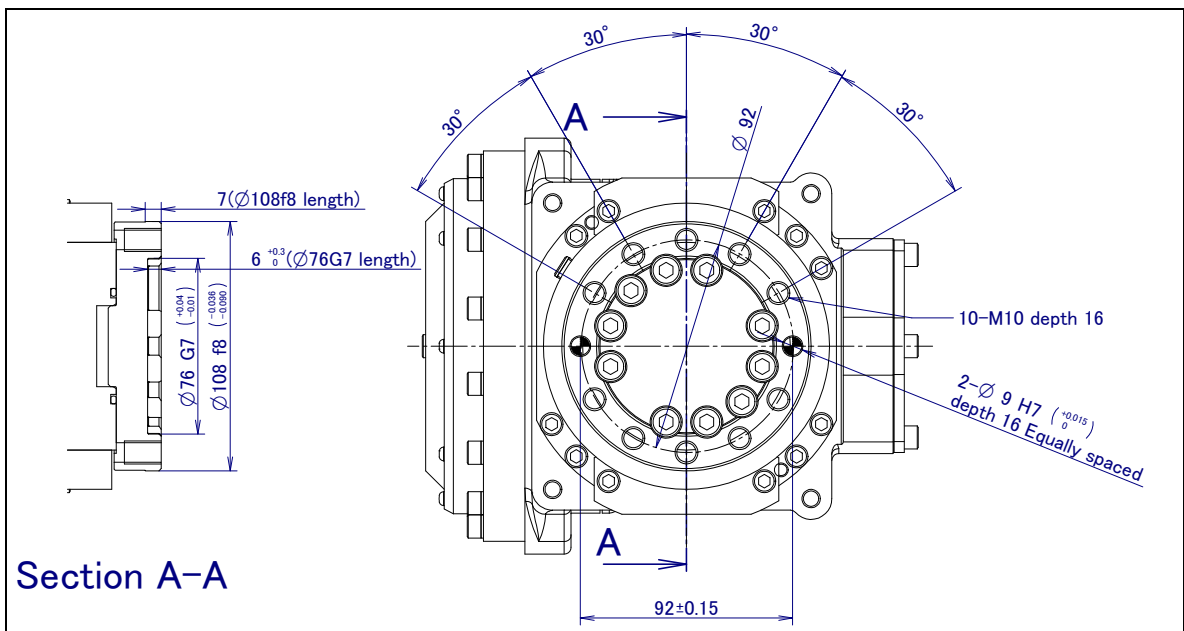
(c) Special flange (M-710iC/50, /70, /50H, /50S)
